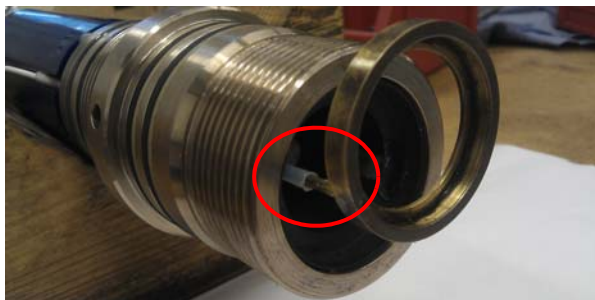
Alignment & fitment of the Soldered Conductor Ring
